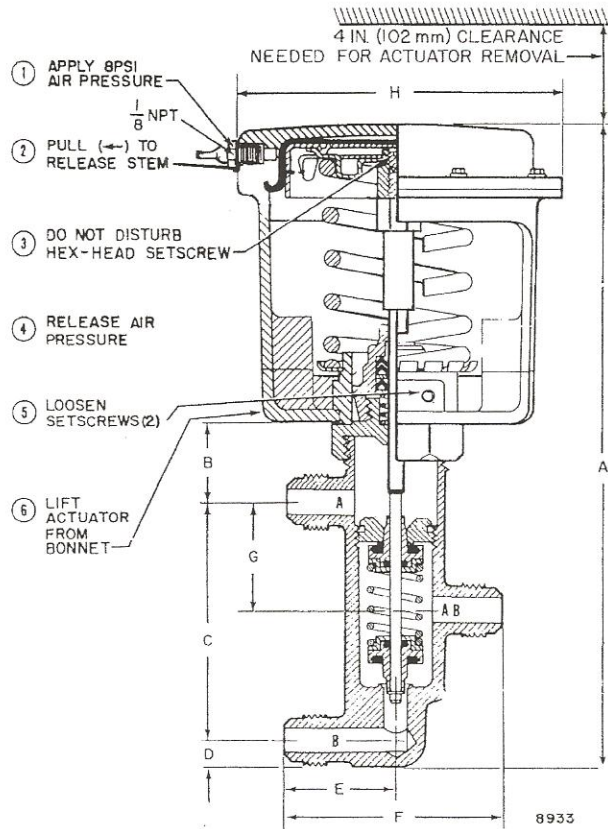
VP522 Approximate Dimensions in Inches (Millimeters). See Table 1.
